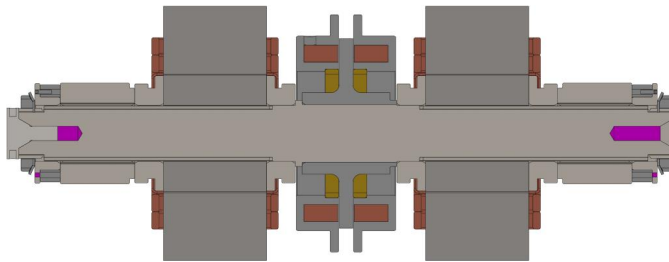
Cross-section of the bearingless machine with tooth-coil windings.
